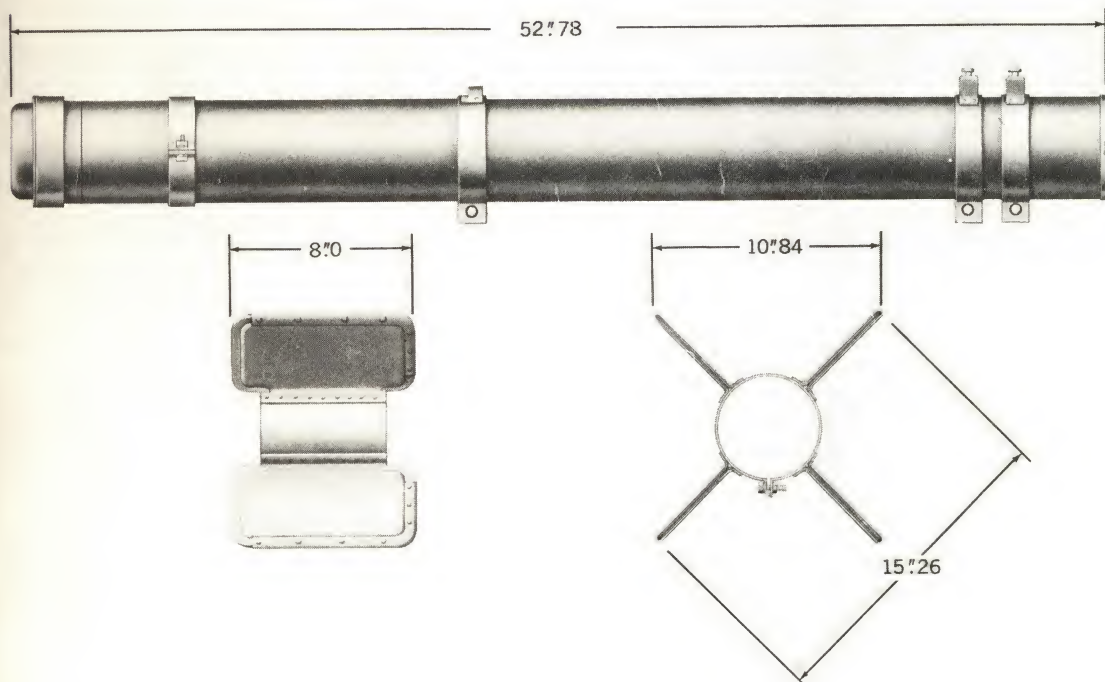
5.0-Inch Rocket Motor Mk 10 Mod 6, External View.
